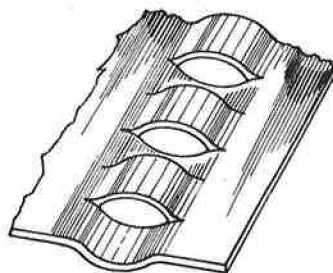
Preparation of metal spring element for extrusional keying of elastomer.
